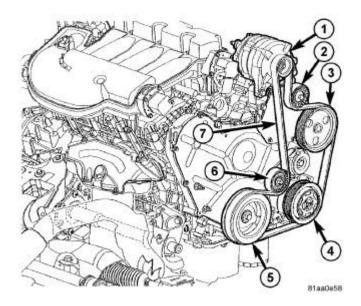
Identifying Accessory Drive Belt & Pulleys
